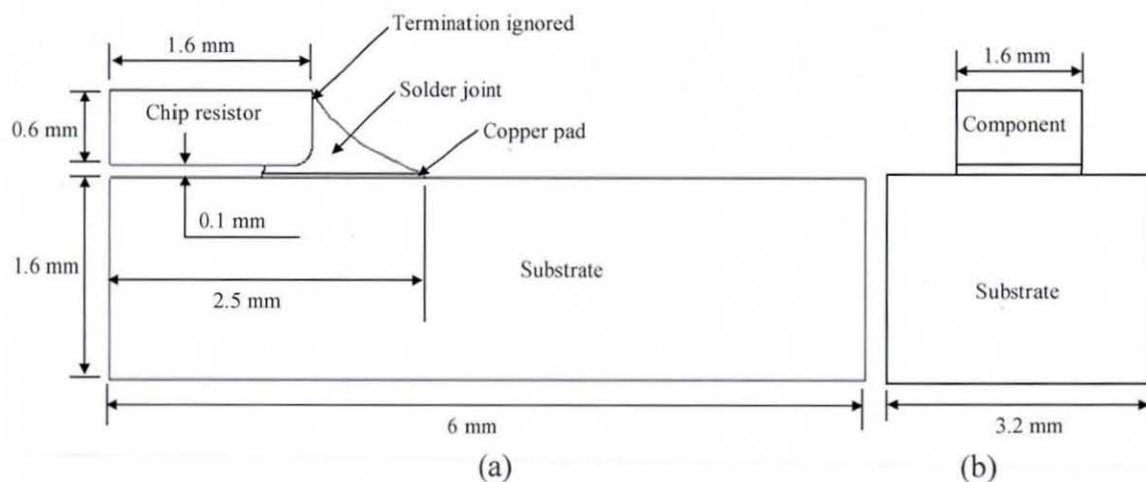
Geometrical details of chip resistor assembly model: (a) side view; (b) front view
